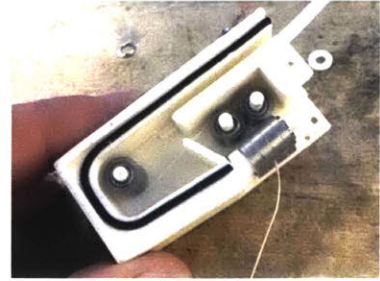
Five rollers transport the fiber through a closed resin container, open view of the nozzle design.
